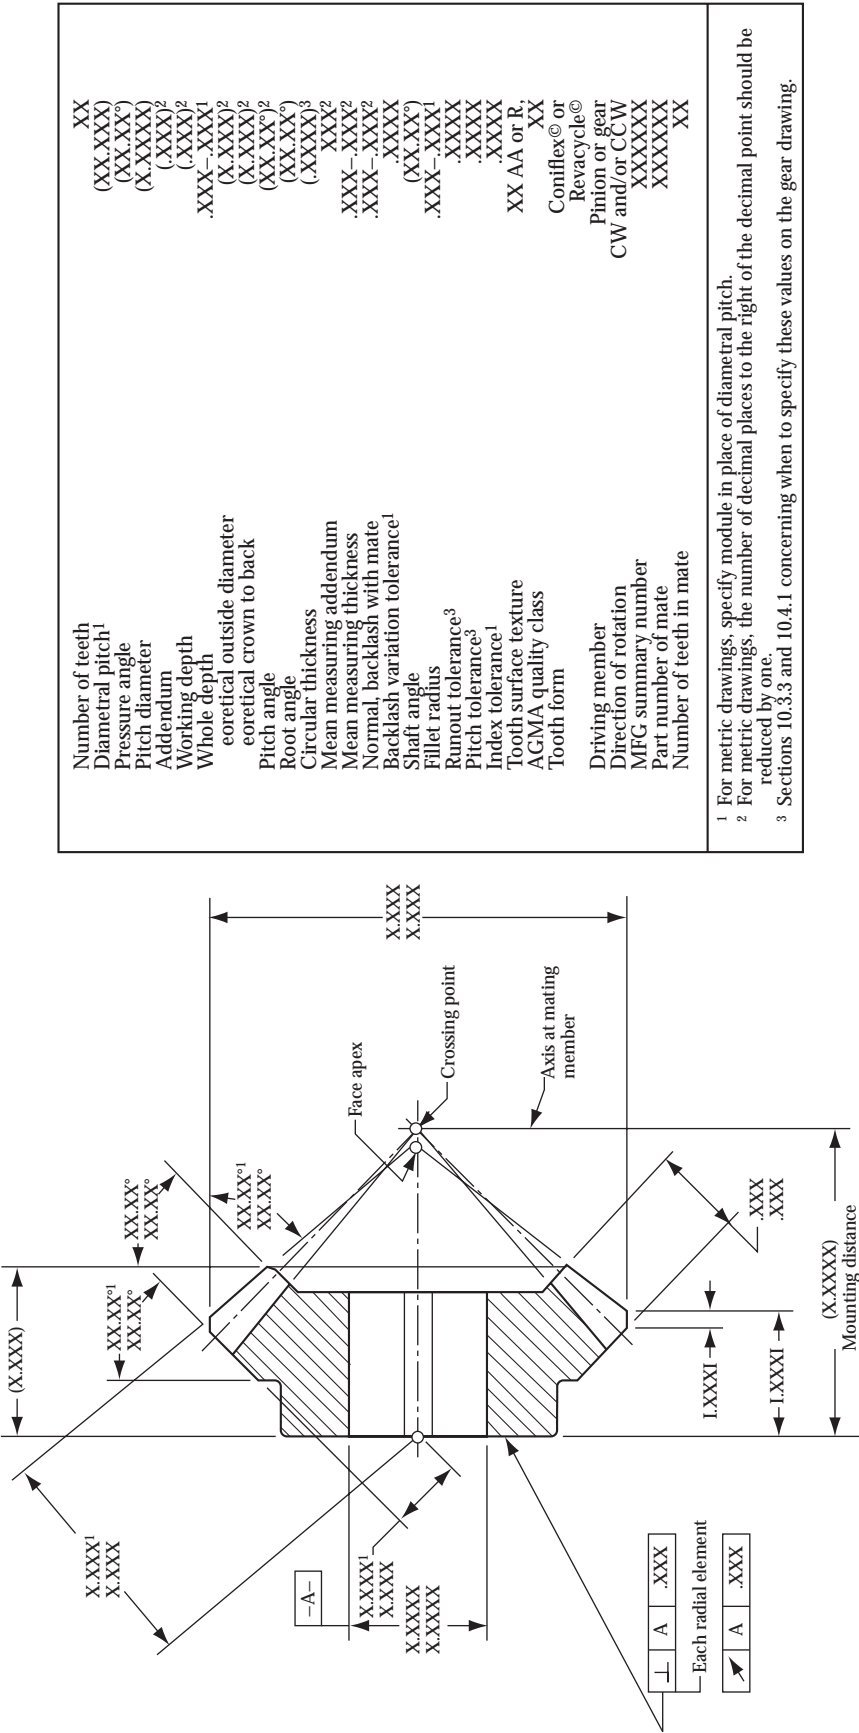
Standard drawing format for straight bevel gears. MFG, manufacture.
